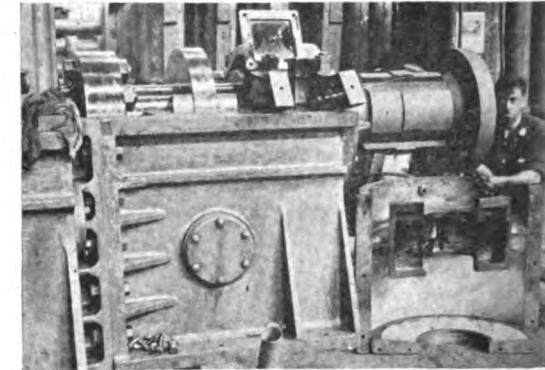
Thrust-bearing mountings of a Skandia-built Werkspoor Diesel-engine of 1150 i.h.p.
